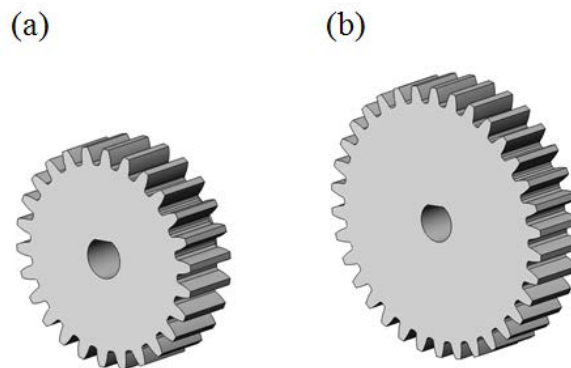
Stepper motor gears for a (a) co-rotating and (b) counter-rotating screw rotation orientation, respectively.
